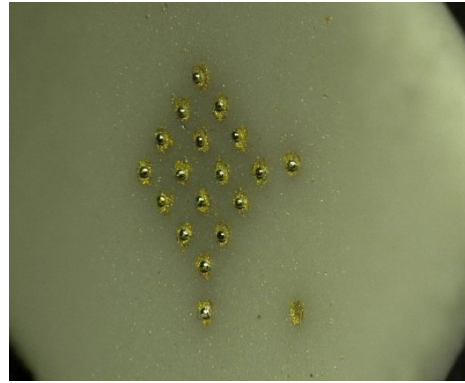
Filled through-hole vias in the ceramic interposer with solder bumps.
